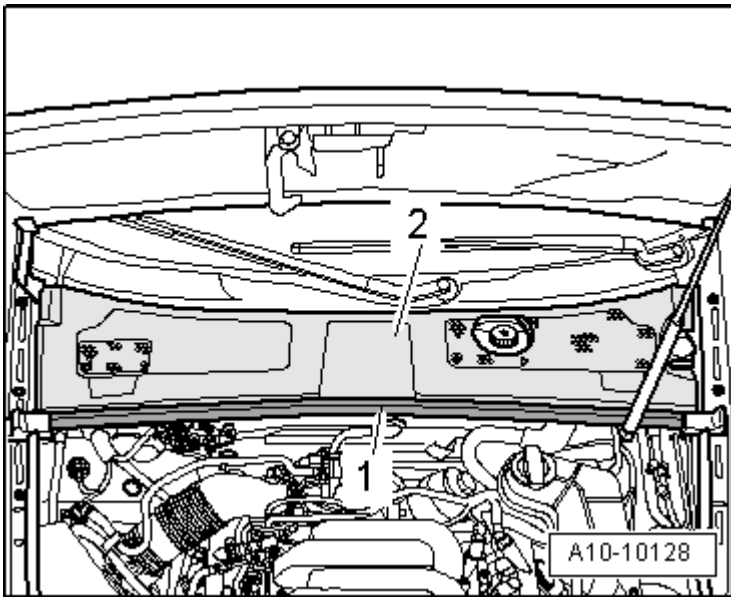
Removing Rubber Seal For Plenum Chamber Cover & Plenum Chamber Cover
